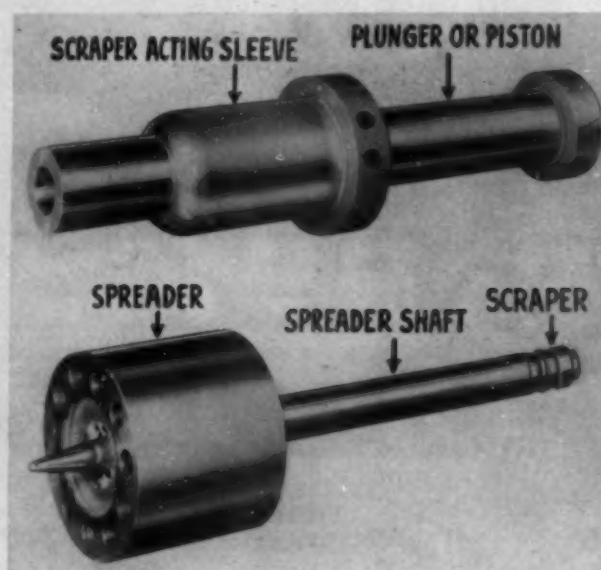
illustrates the scraper shaft and design of a new type vertical injection cylinder assembly (patents pending) to offset piston sticking trouble. Developed by Lester Engineering Company
